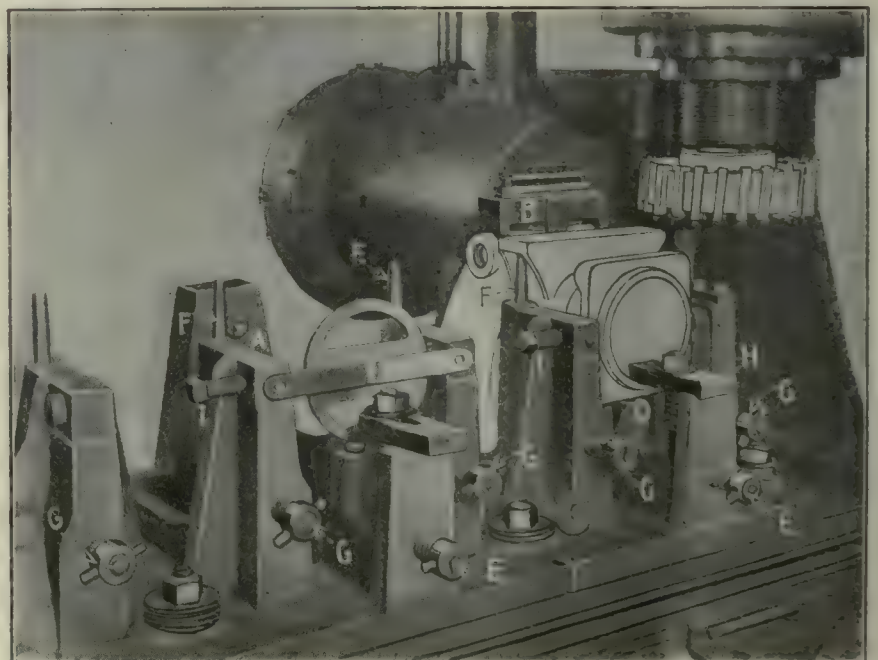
MILLING FOOT ON SIDE OF CYLINDER
